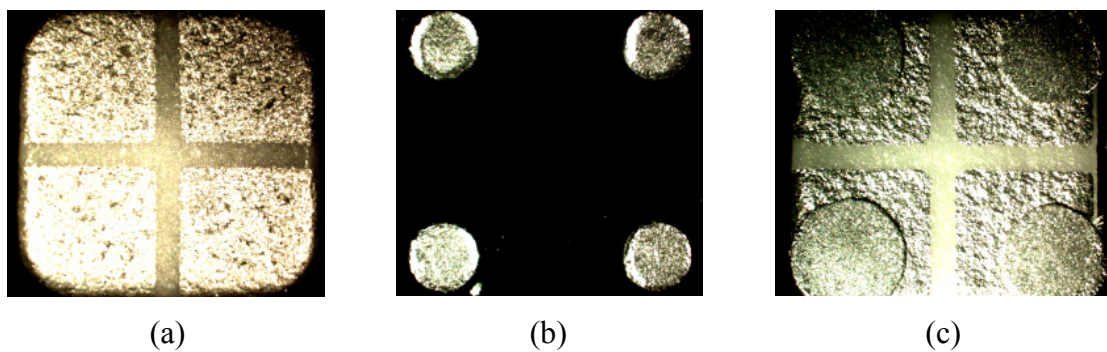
Plasma-shell assembly method where (a) conductive pads with cross-shaped slots were printed on top and bottom of each shell, (b) conductive epoxy dots were stenciled onto the PCB, and (c) each shell was placed onto the PCB, achieving optimal contact (fabrication trial seen through a glass slide pictured above).
